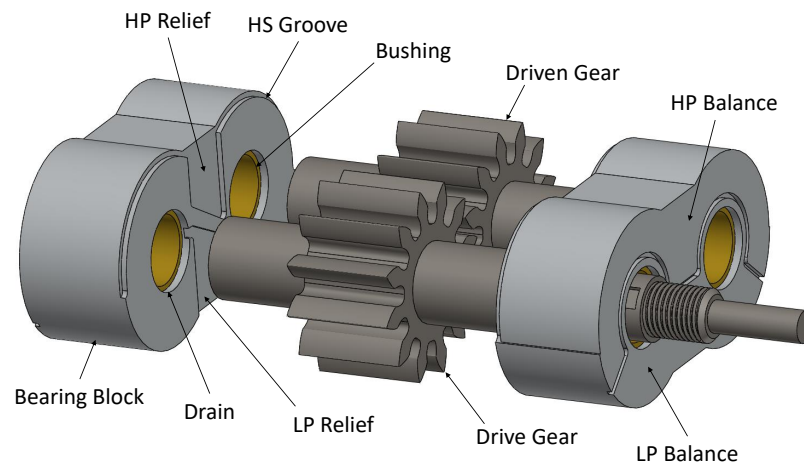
Alternate form of pressure compensation in external gear machines using bearing blocks
